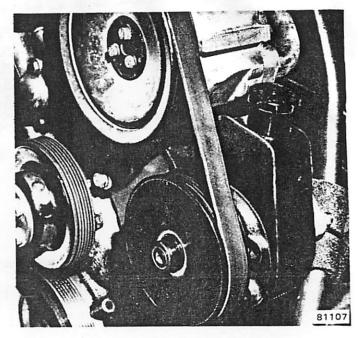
L-50 Power Steering Pump Belt Drive (California Only)
